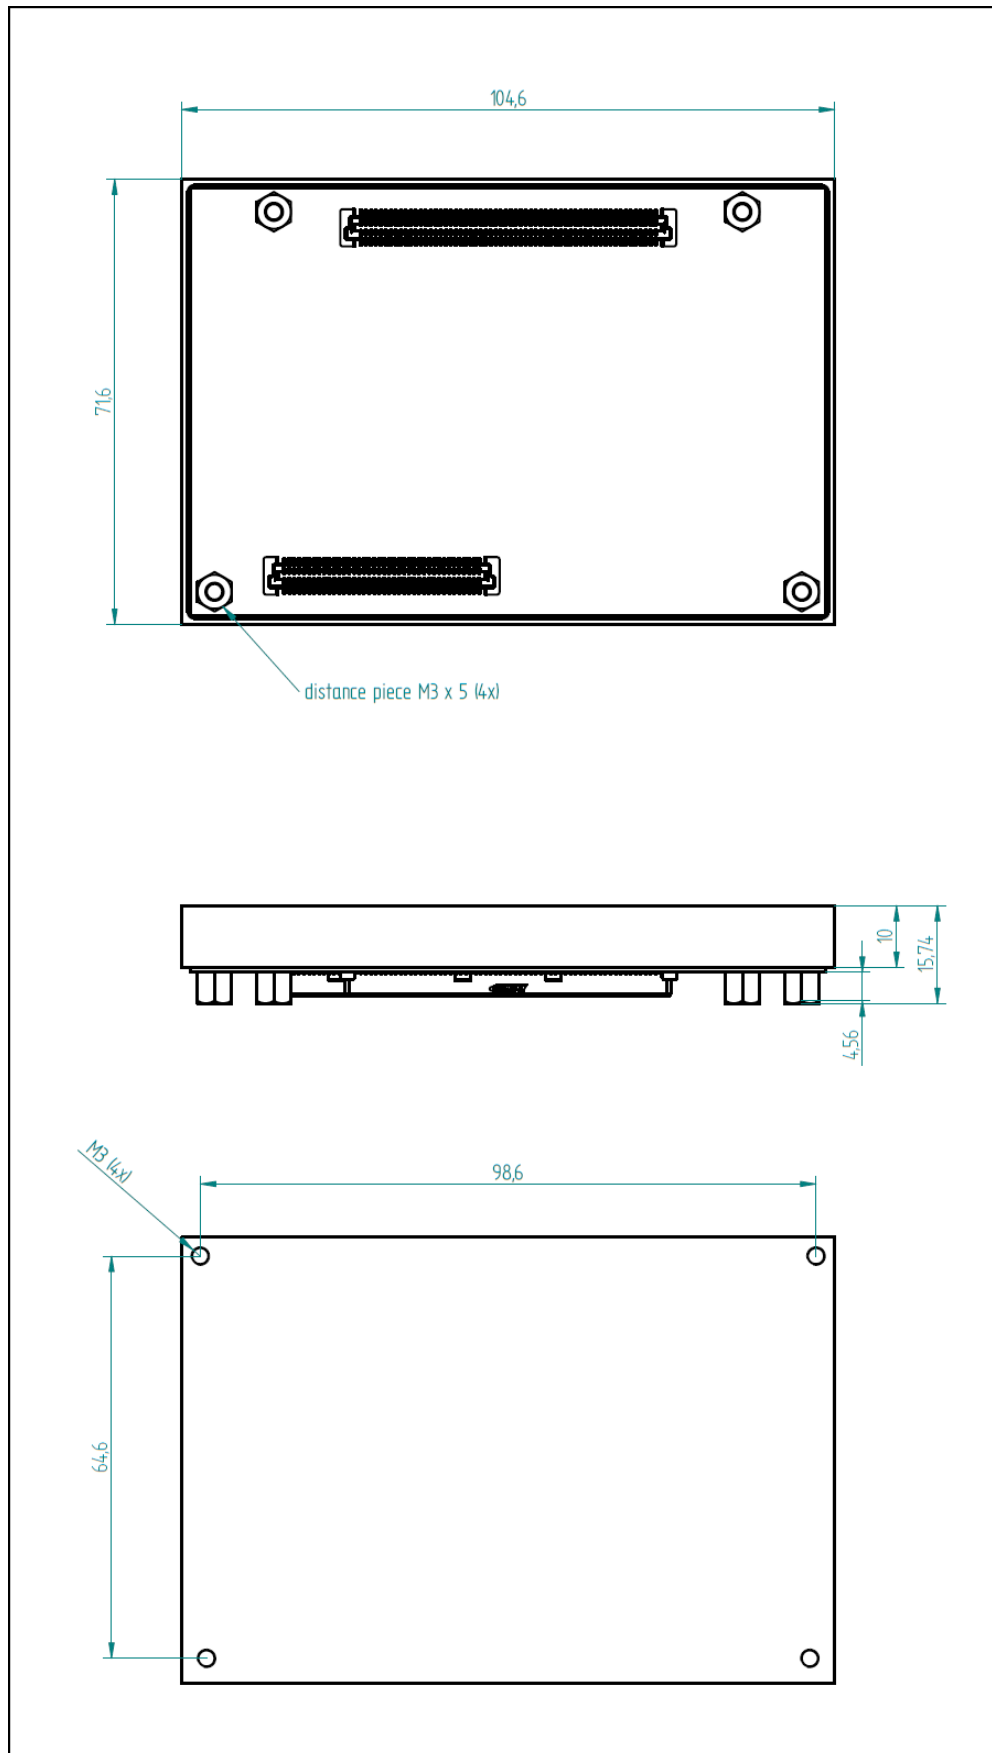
EESX module with mounted cooling plate; Bottom-, side-, and top-view
